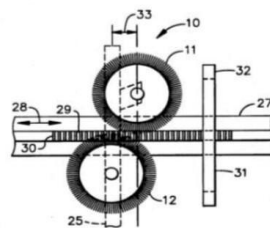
Broach Tool Chip Remover by Paul C. Brown
